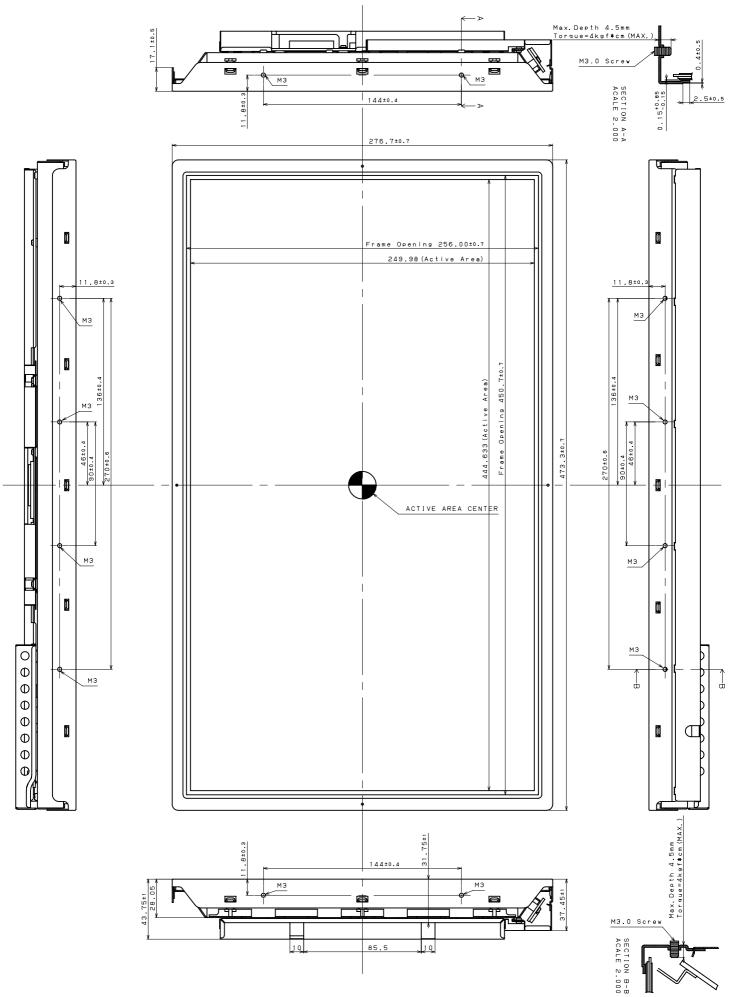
OUTLINE DIMENSIONS (FRONT SIDE)
